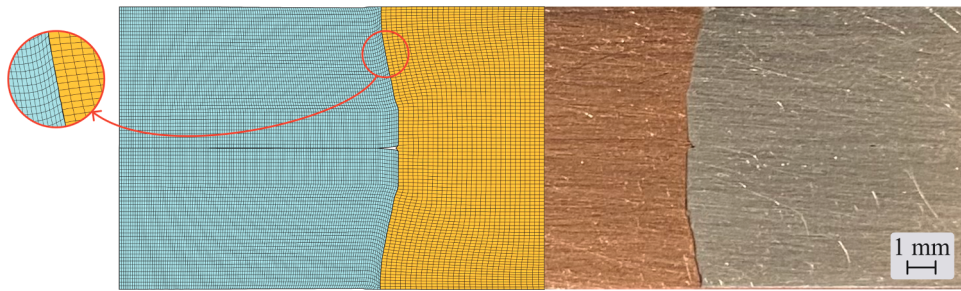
Finite element predicted geometry and photograph of the cross section of a double-flush riveted lap joint made from two aluminum AA6082-T6 sheets and a C11000 copper rivet. The sheets were punched with a punch-to-die clearance of 0.8 mm.
